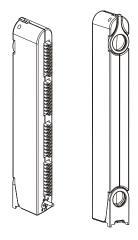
Terminal Block (TB) Holder-Front and Back View
